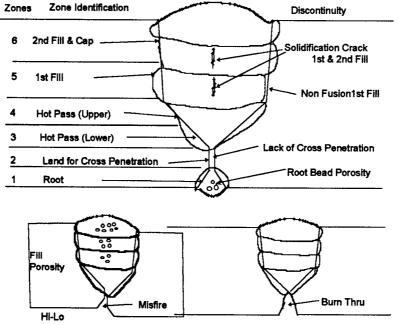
Schematic Representation of Weld Zones and Discontinuities
